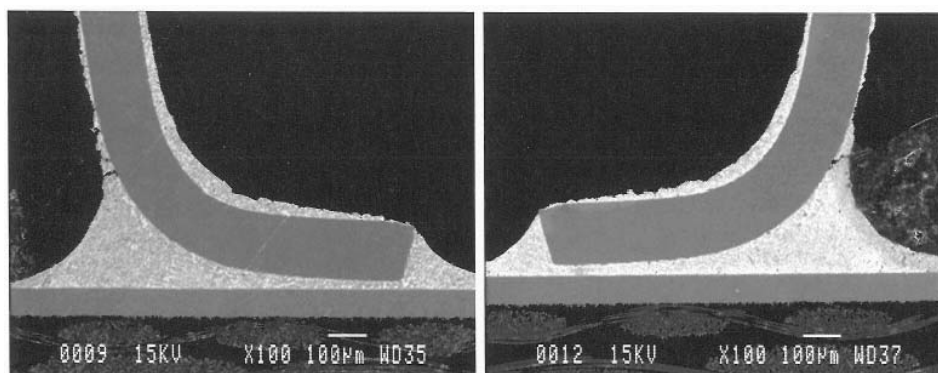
Microsections of centre solder joints on the board with CV-2946 930 as staking compound
